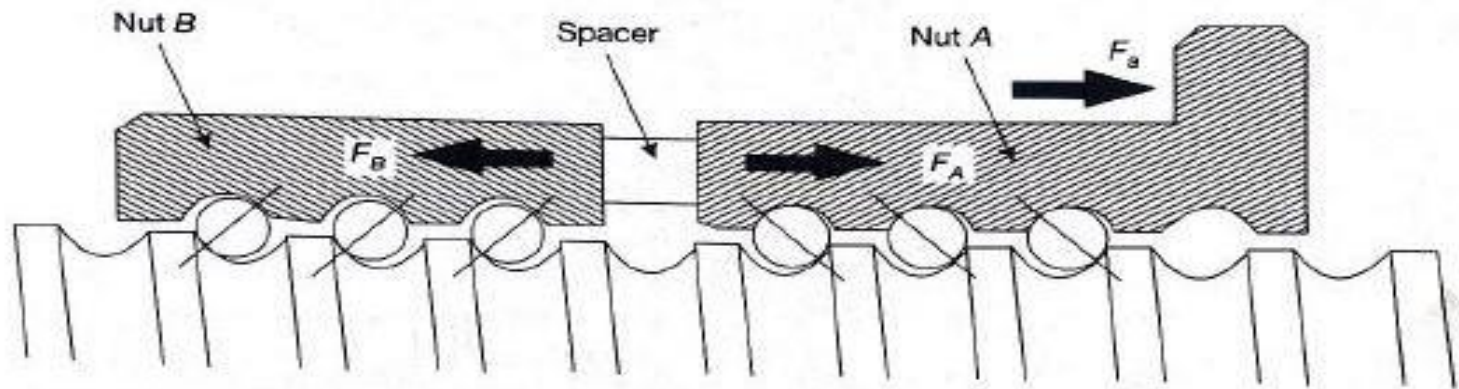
Preloading of the recirculating ball screw and nut arrangement
